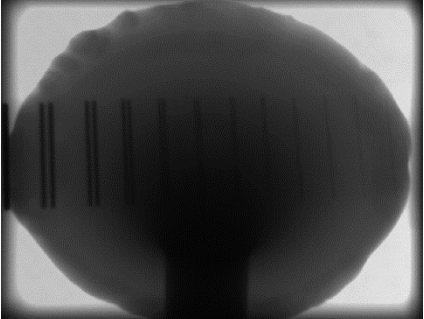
Valve seating face after TIG hard-facing, filler metal cross-section: 1.3 mm × 1.3 mm, I= 64 A
